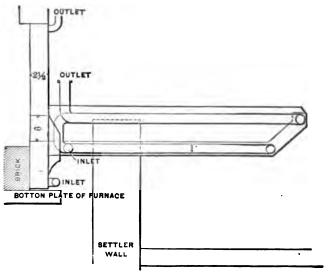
The Hixon Slag-spout; Longitudinal Section.
